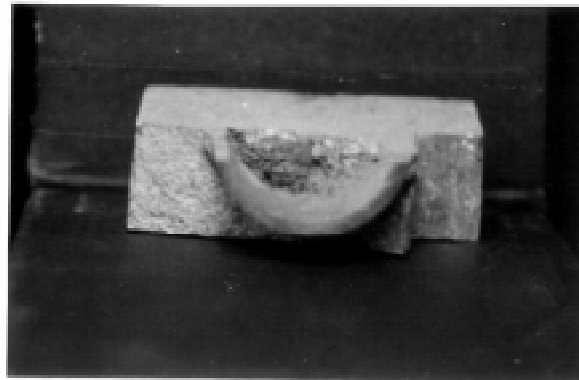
The cast welding molten 700 °C A356 Al alloy and 600 °C 7005 Al/Al₂O_{3(0p)} composites seamless pipe, OM photo.
